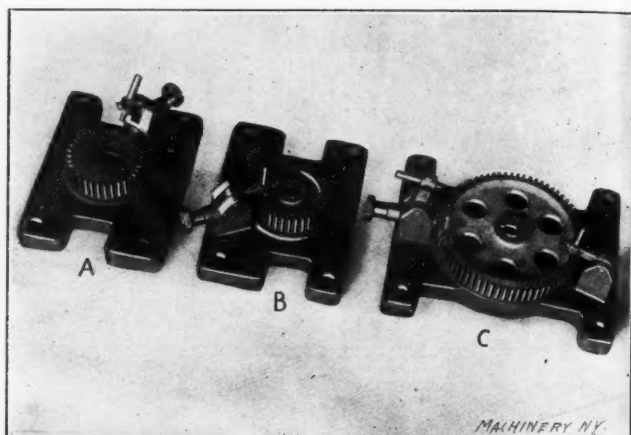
Keyseating Fixture used for Holding and Marking the Gears
